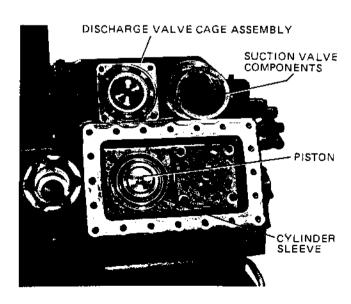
DISCHARGE & SUCTION VALVES REMOVED
